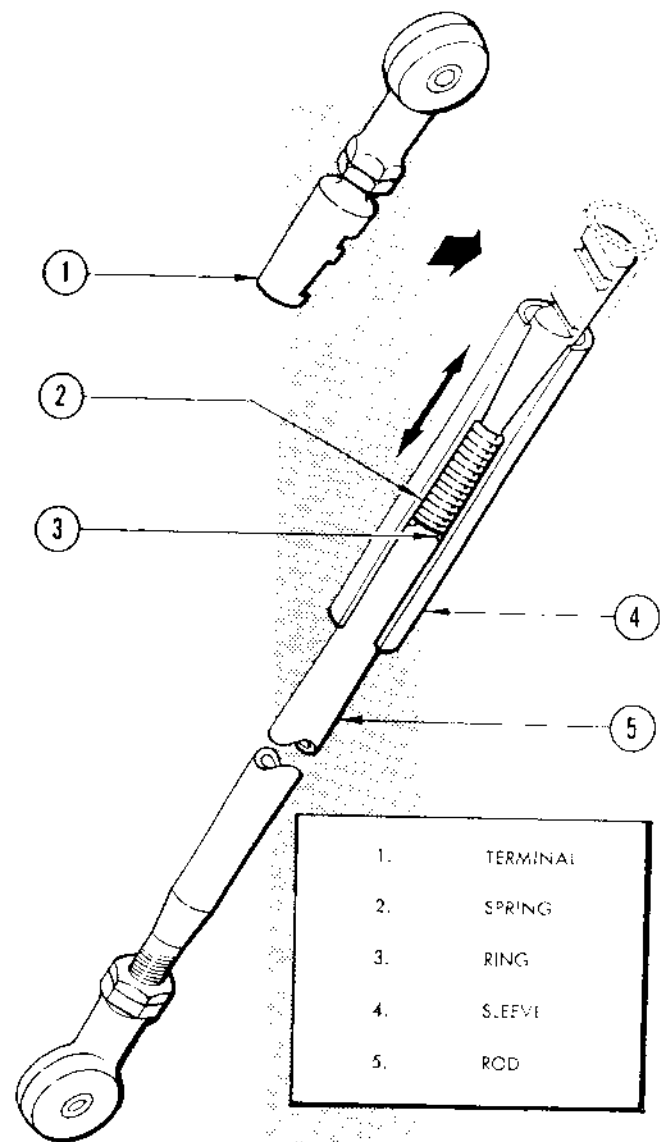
Quick Disconnect Rod, Engine Control Valve, P-80A-1 Airplanes Only
